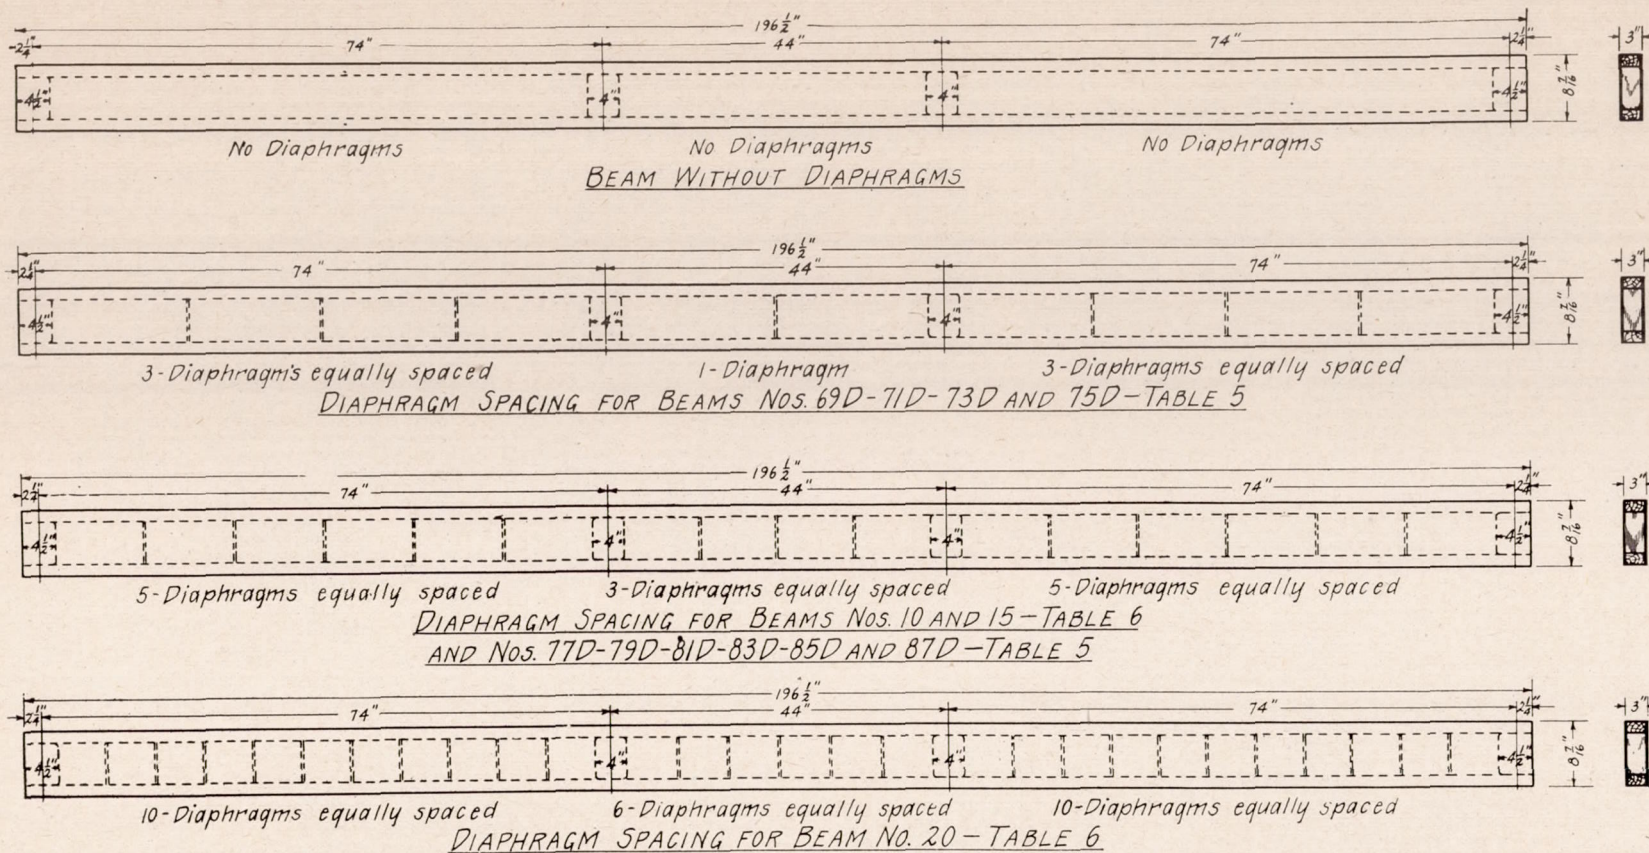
Design of beams approximating the mid-section of the Navy BS-1 box beam, showing various diaphragm spacings used
